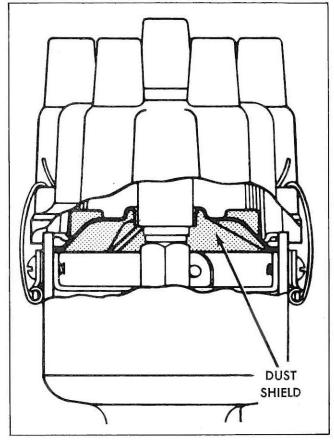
Dust Shield Installed on Six Cylinder Engine Distributors
